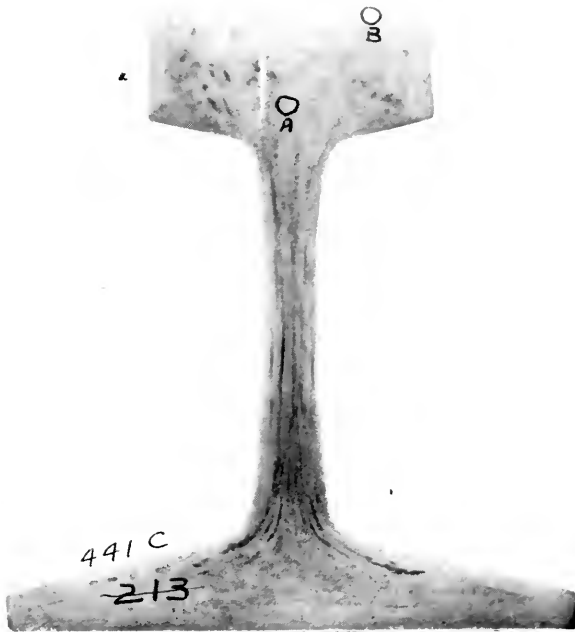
C. LIGHT ETCHING OF RAIL 441.
